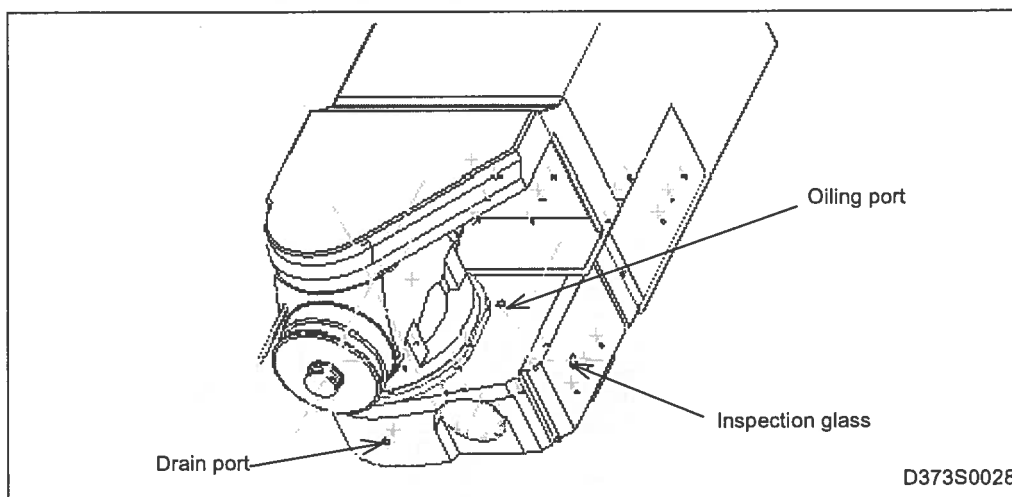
Oil level inspection and oil replacement for the milling head
